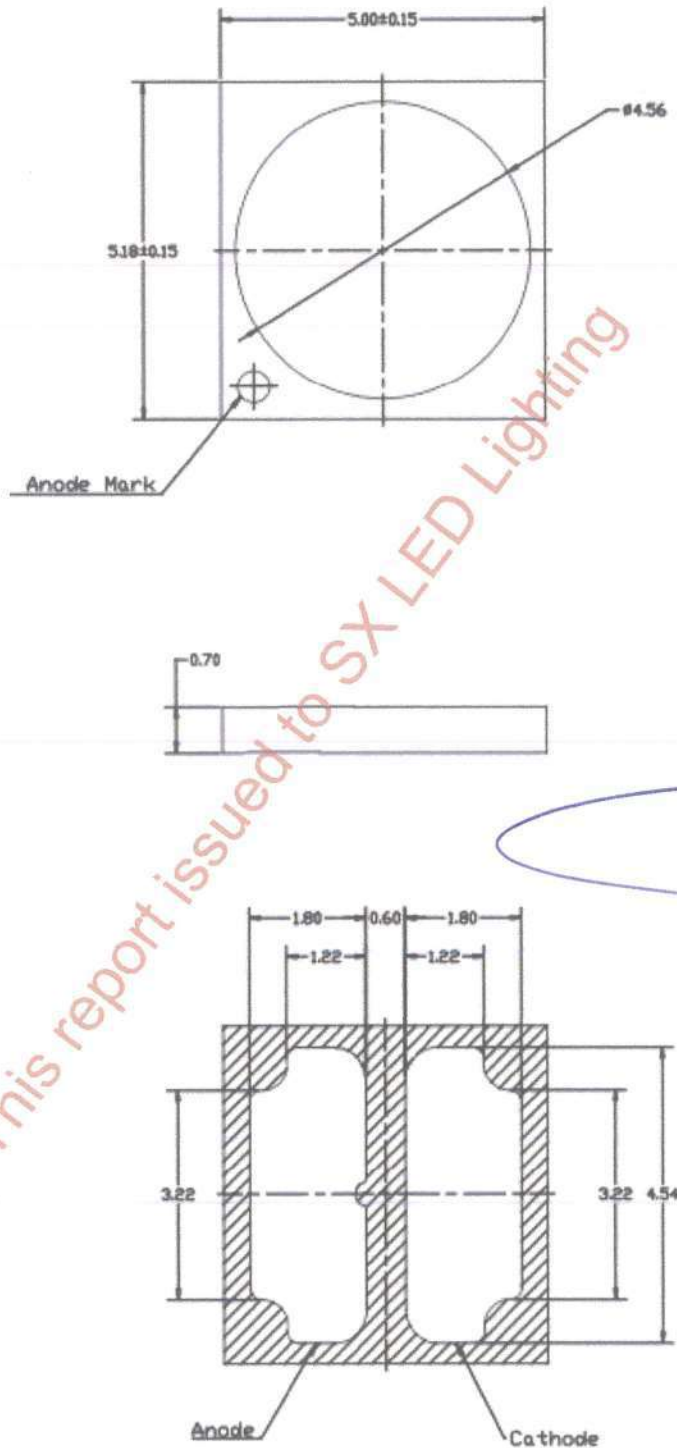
Mechanical drawings for the LUXEON 5050 (all dimensions in millimeters).
